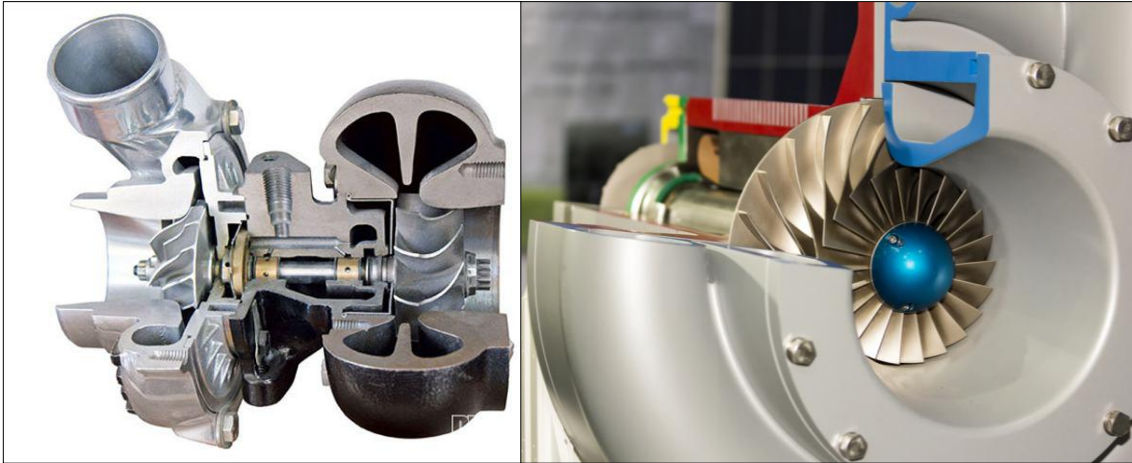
Examples of casting impellers: a) Turbocharger (Chevrolet, 2016), b) Centrifugal pump (ScottTech, 2017)
